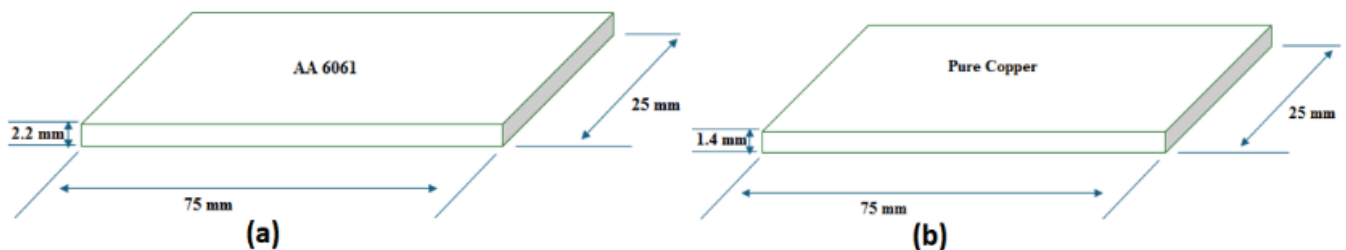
Schematic drawing of (a) AA 6061 aluminum alloy (b) pure copper plates dimensions.
